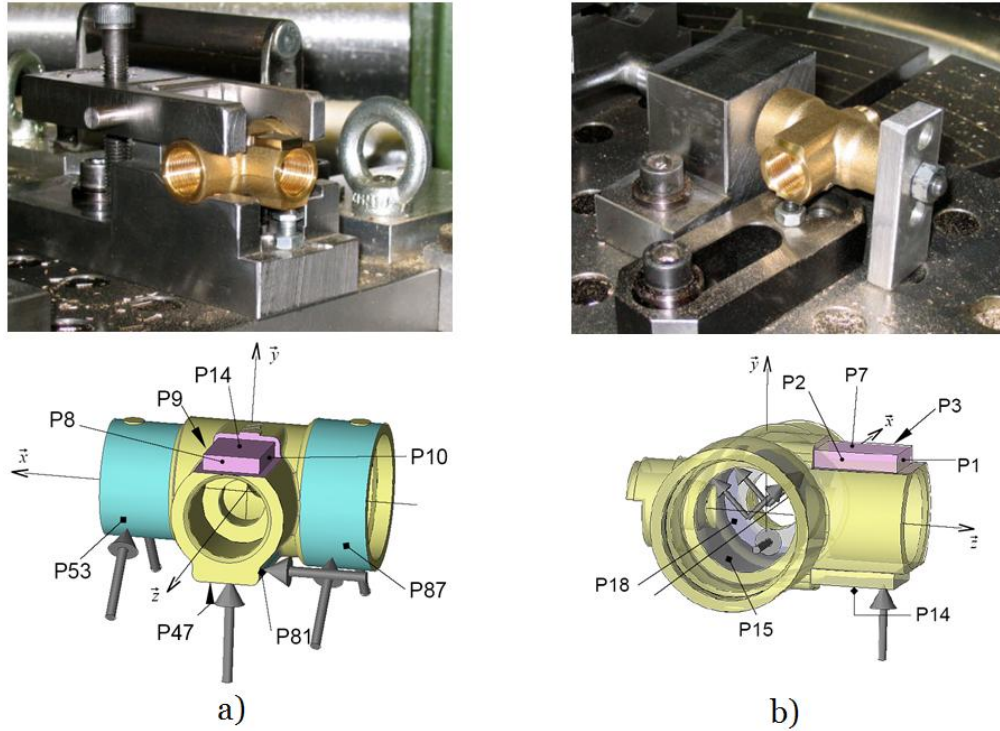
Two different fixtures [[TICHADOU 2005](#)]
